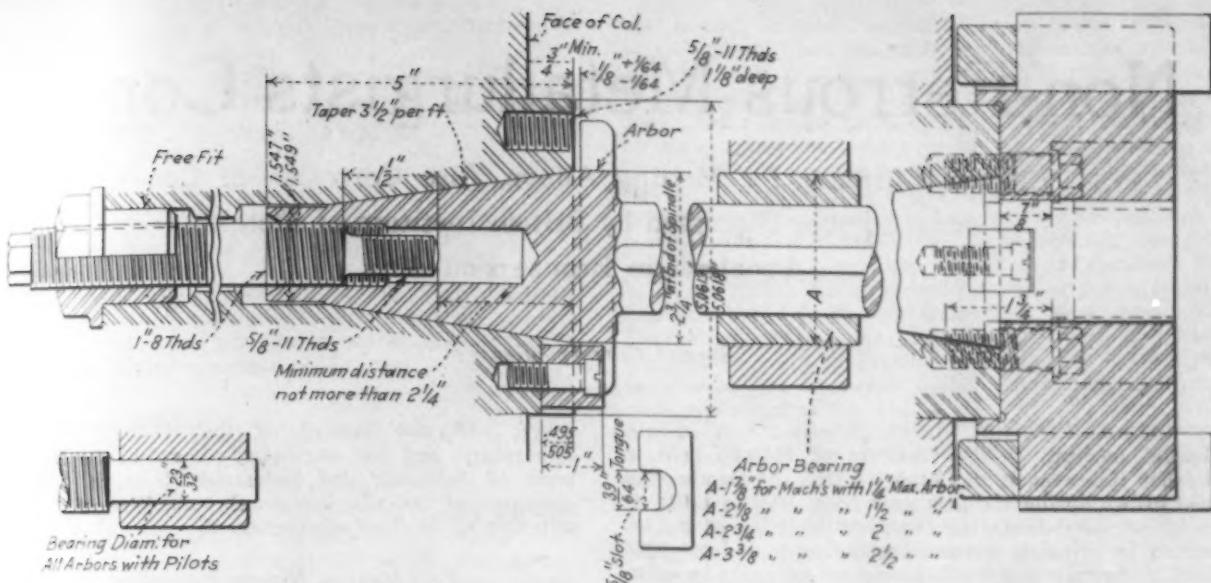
Sketch Showing Design of Draw-in Bolt, Arbor Bearings and Other Details of Standardized Spindle End
